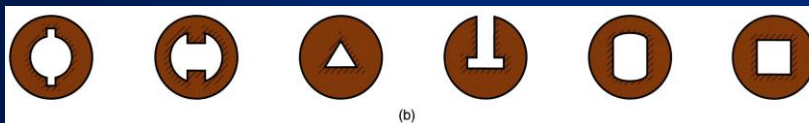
Work shapes that can be cut by internal broaching; cross-hatching indicates the surfaces broached
